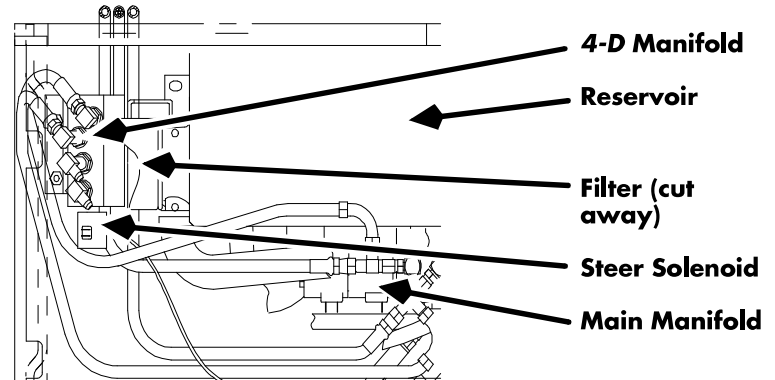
4-D Caster Wheel Positioner Solenoid Location
